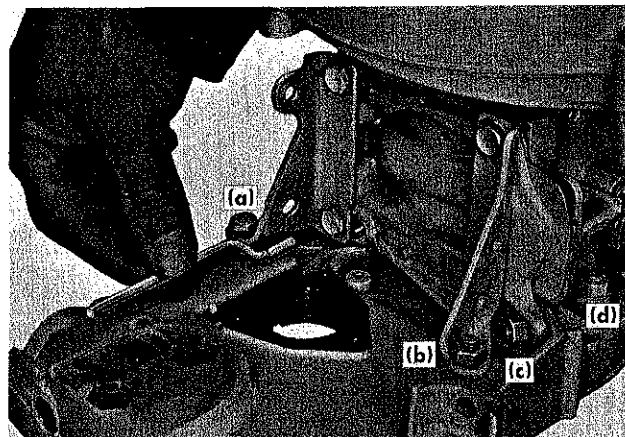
Screws (a) and (d), and nuts (b) and (c) must be removed allowing the transmission to be detached from the engine as a complete unit. Note that the nut (c) is on the gearcase brace side of the stuffer. Note also that the oiler push rod has a sleeve on one end to permit removal from the bar mounting pad.
